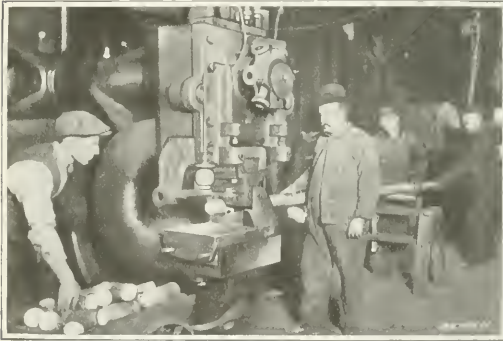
Cutting off Blanks for Russian 3-inch High-explosive Shell Forgings in a Shearing Press
